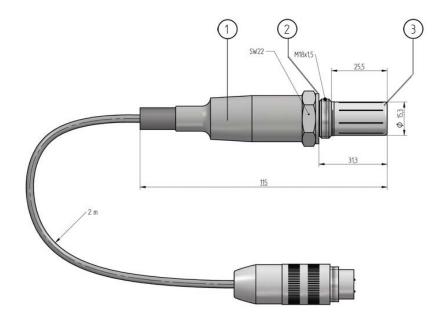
Dimensional drawing KS1D Combination Probe without housing
